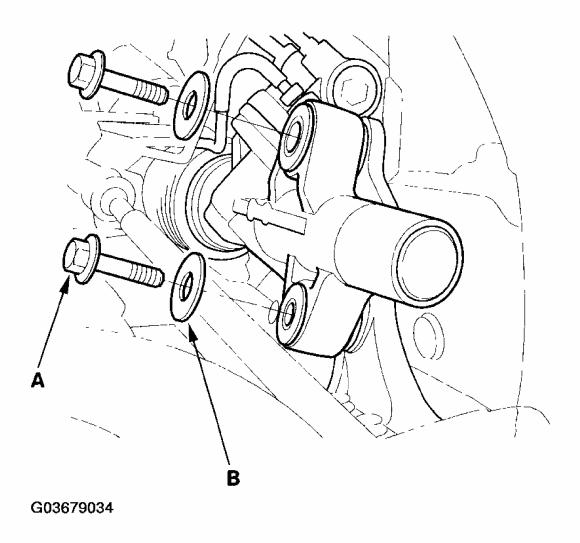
Installing Two 10 Mm Flange Bolts And Washers On Left Side Of Gearbox
